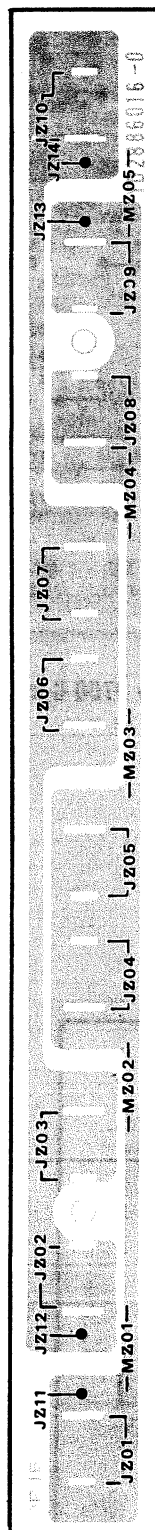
Dial Lamp Assembly PZ01 Component Locations
